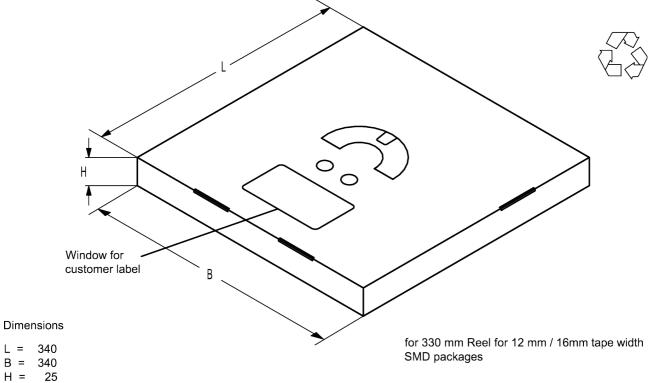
Drawing of folding box for reel with diameter of 330 mm.
